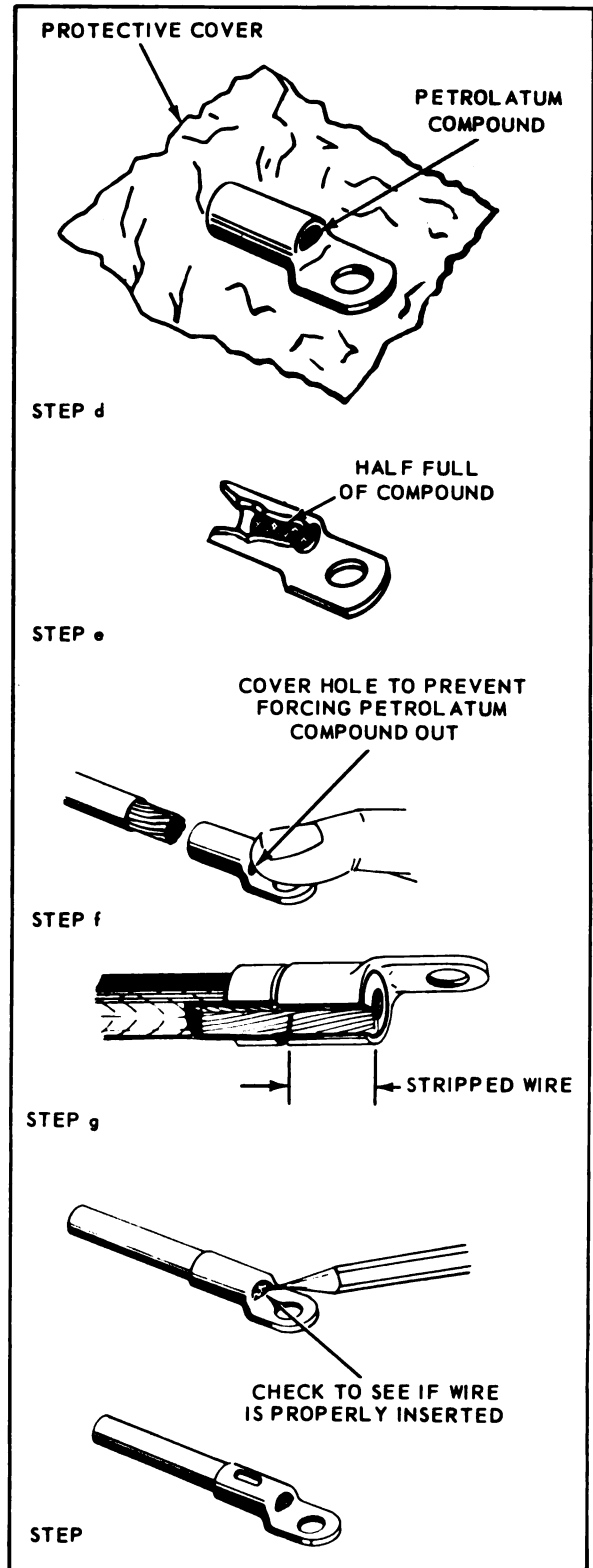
Inserting Aluminum Wire into MS25021 Aluminum Terminal Lugs
